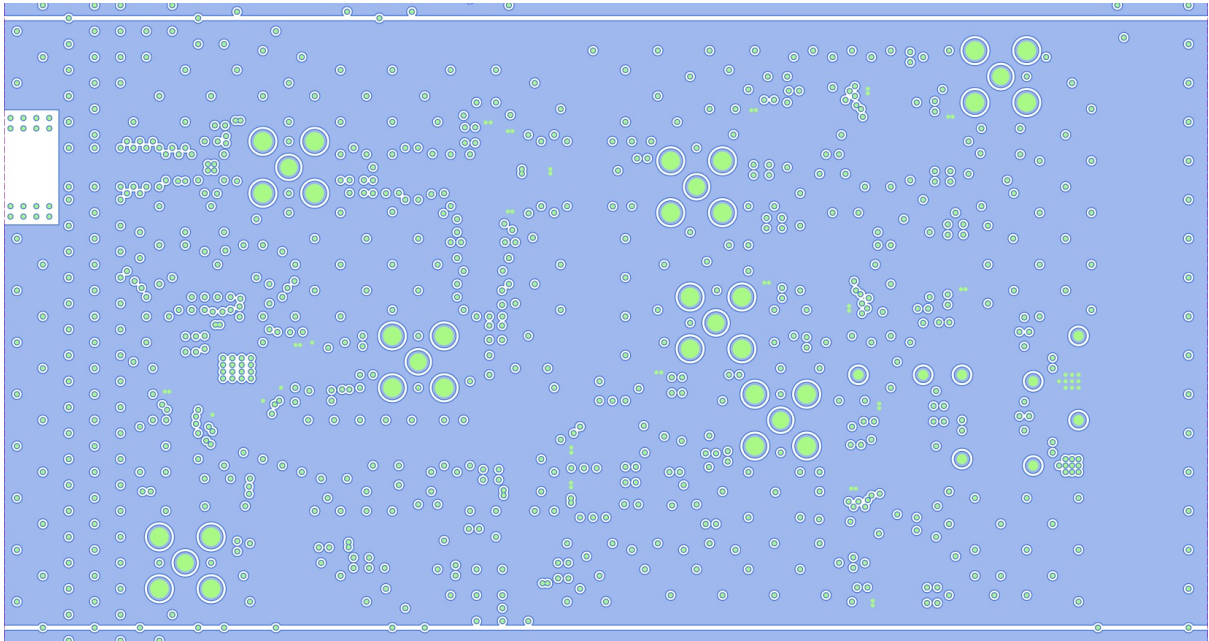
DLL-HPC received signal beamformer PCB layout for element 1 inner layer 3
